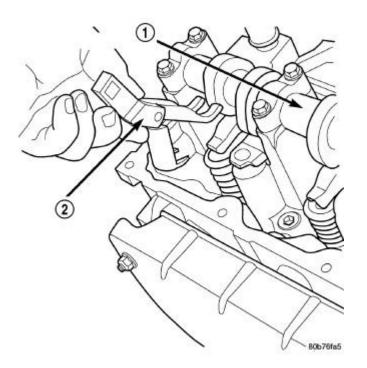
Rocker Arm - Removal/Installation Courtesy of CHRYSLER LLC
